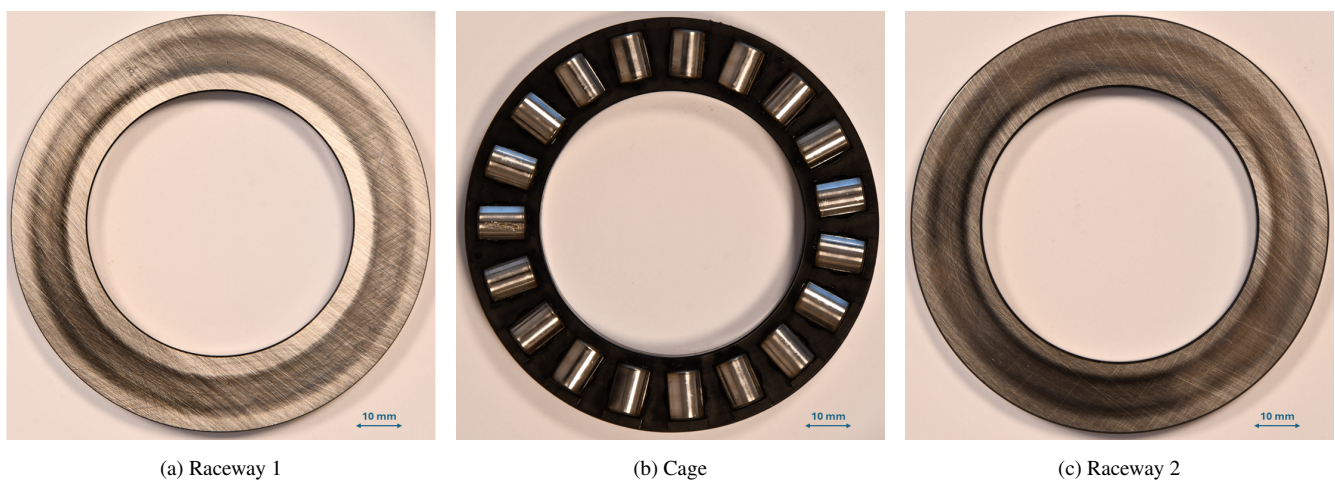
Pictures of bearing components for Bearing 2 of T05. Refer to Table 5 for designation of tests. The outer diameter of the bearing is 95 mm and the diameter and length of the rollers are both 11 mm.
